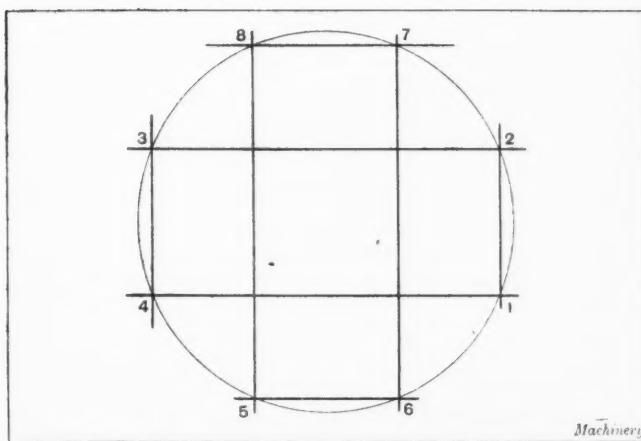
Diagram Showing Method of Adjusting Slides in Drilling Flange Holes
